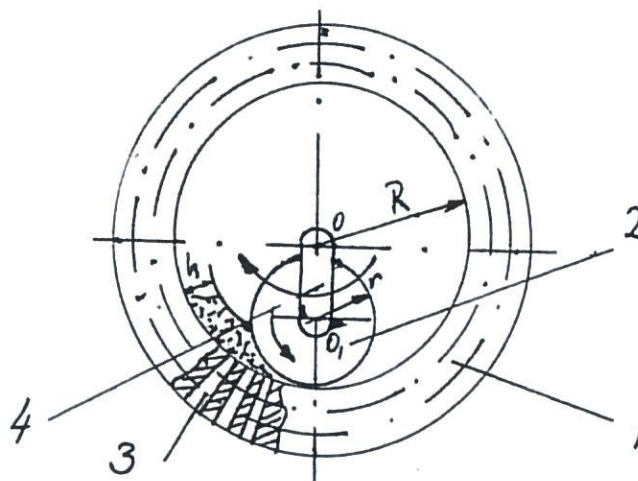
Operating principle of the ring die pelleting machine, [14]
